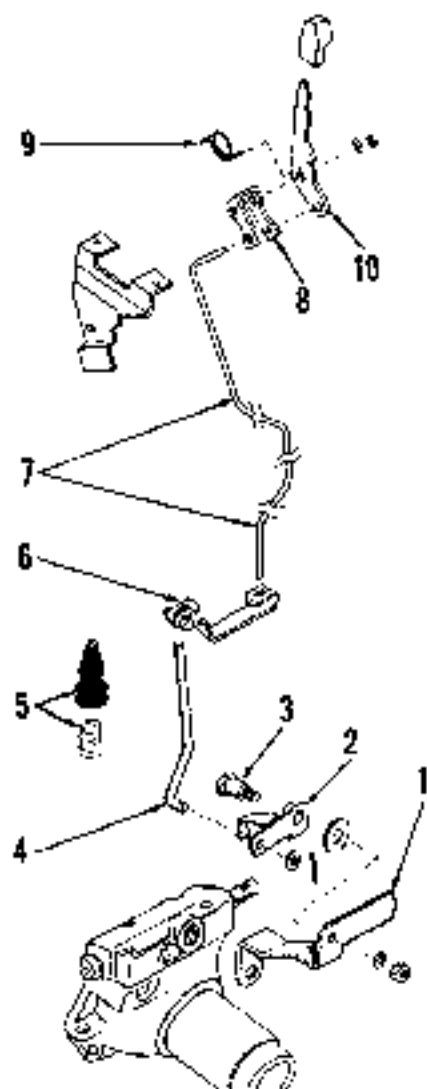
Exploded view of Multi-Power shift control linkage and associated parts.
